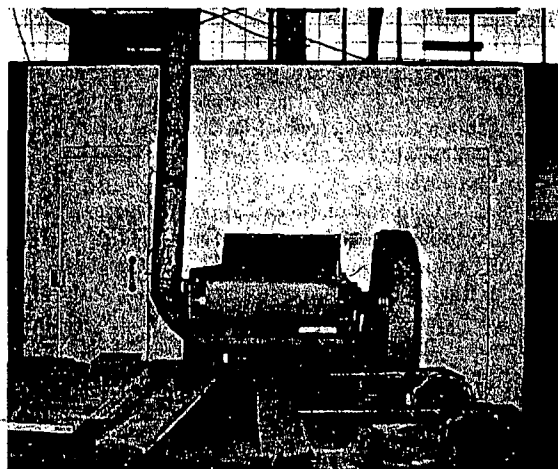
An enclosure around a large planer. This view shows opening at discharge end of machine. Note doors for access to interior of enclosure and moving belt that conveys wood through output duct. (Courtesy Kroehler Manufacturing Co.)
